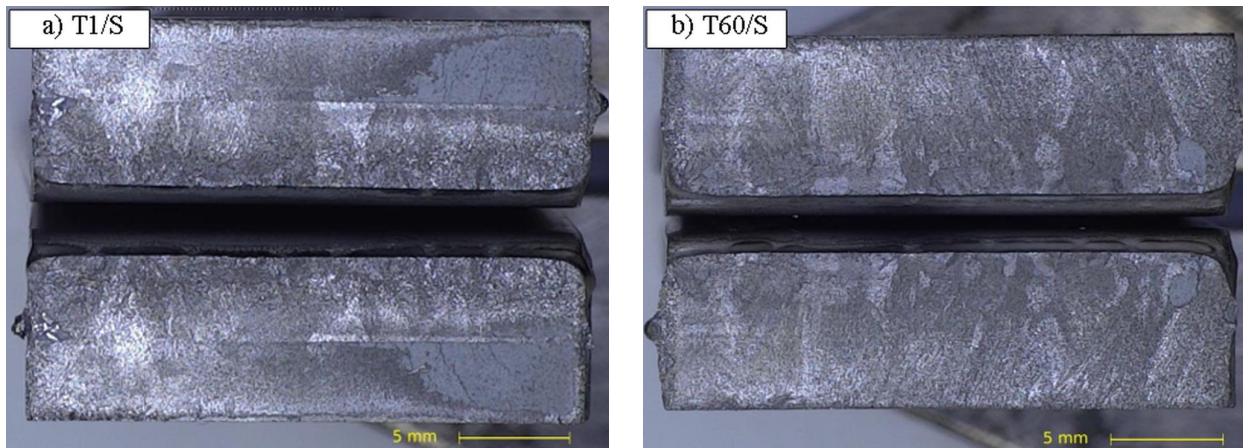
View of brazed surfaces of Inconel 718/Palnicro 36M joints after peel test for brazing time of 1 (a) and 60 min (b)
